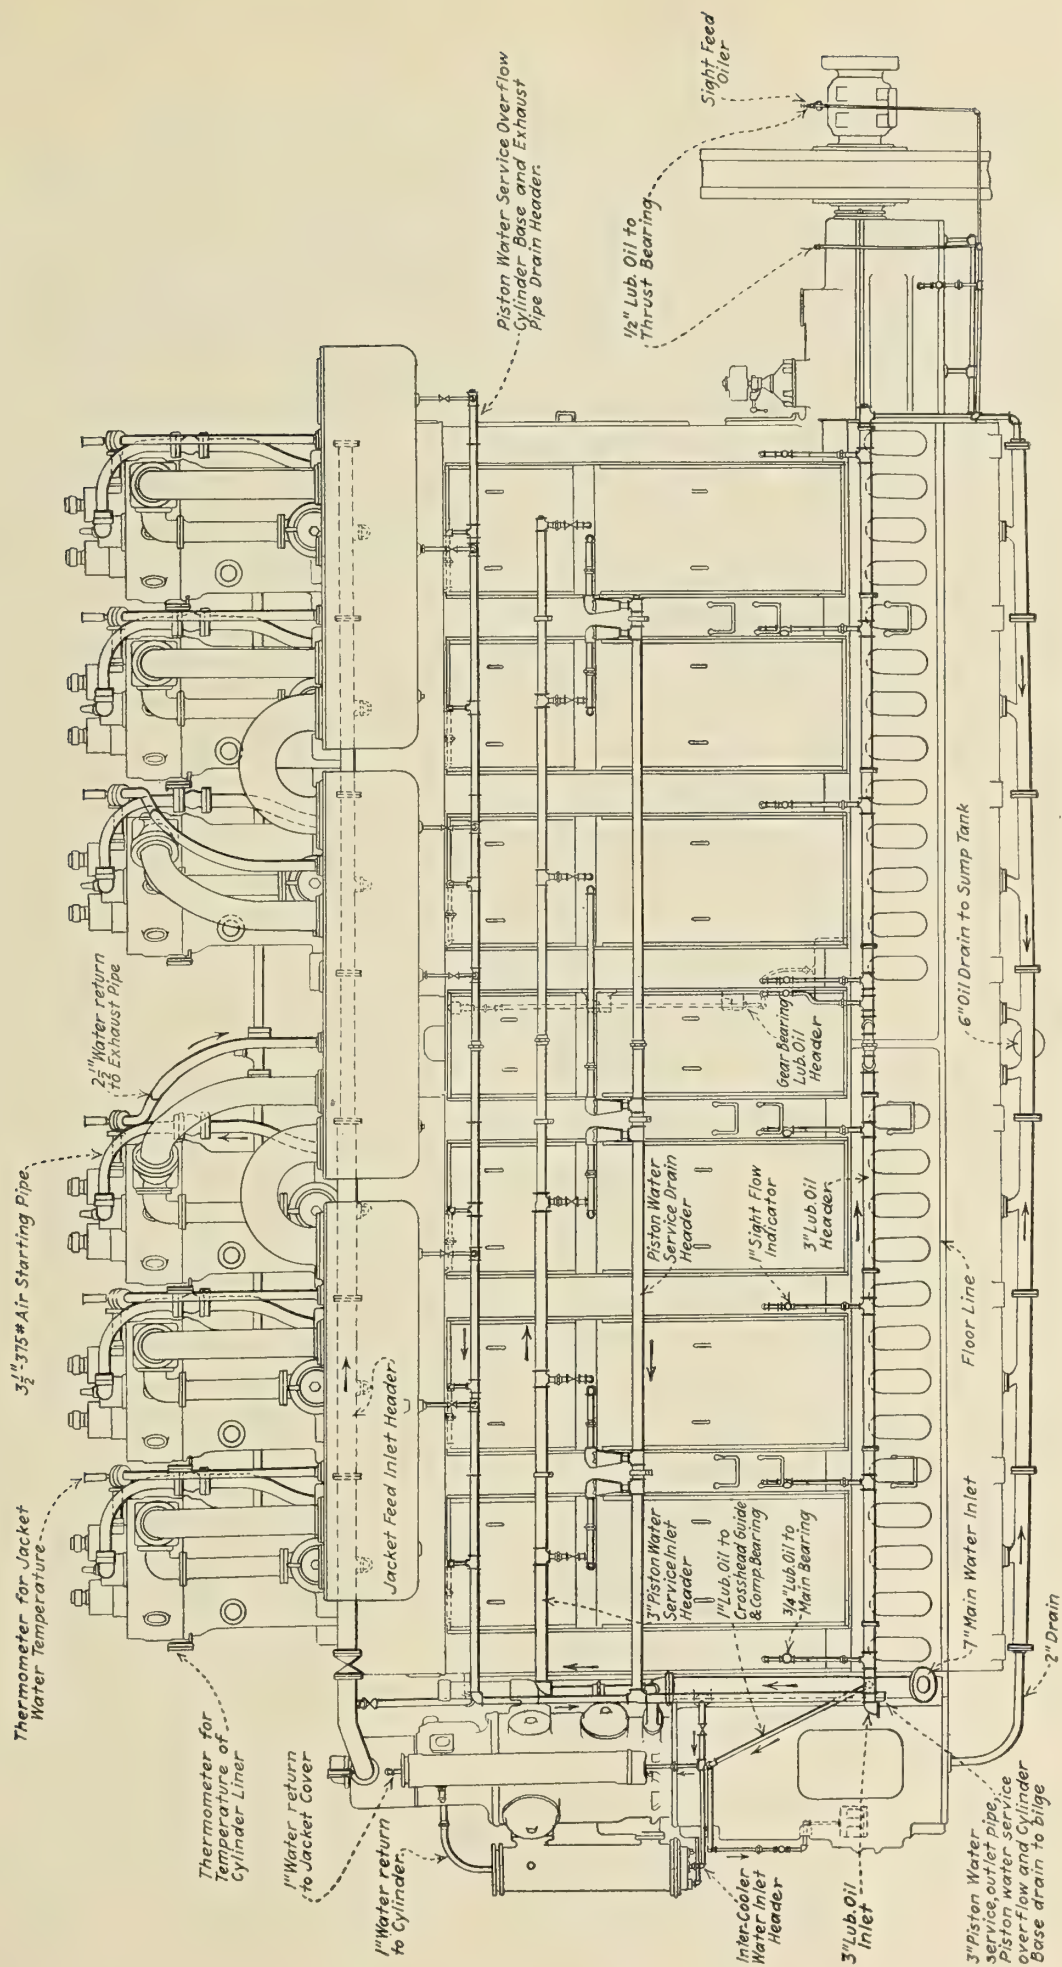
Back of the Engine, Showing Details of Piping Arrangement
